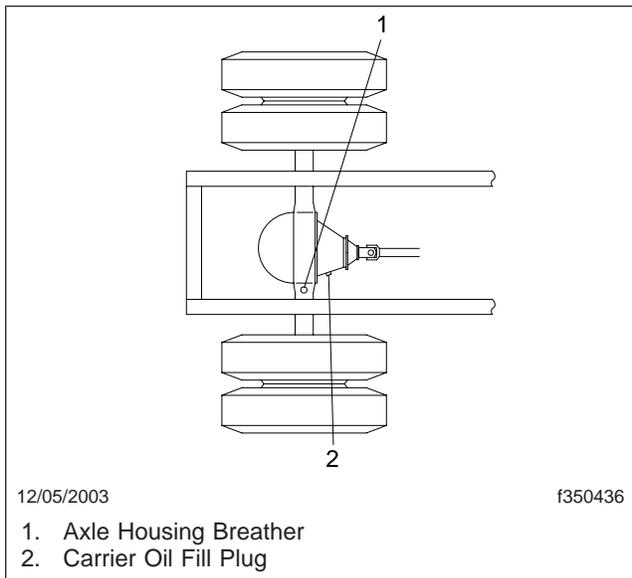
, Meritor Fill Hole Plug and Axle Housing Breather Locations
